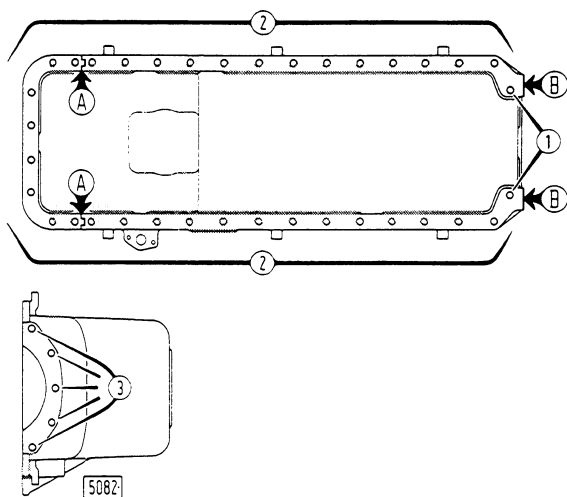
Engine oil pan tightening diagram (See instructions in para. 2.2.1).
